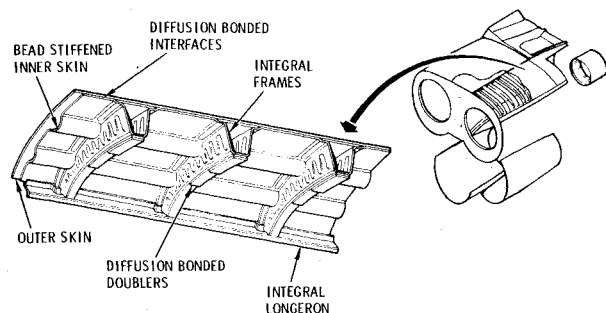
Fuselage-type structure using SPF/DB with integrally formed frames.
